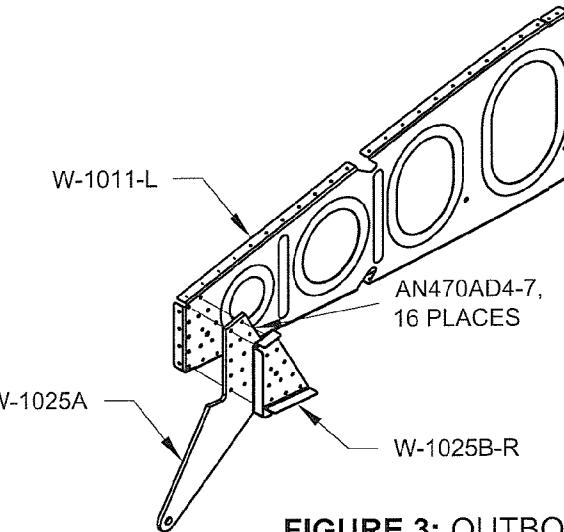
OUTBOARD FLAP HINGE ASSEMBLY
